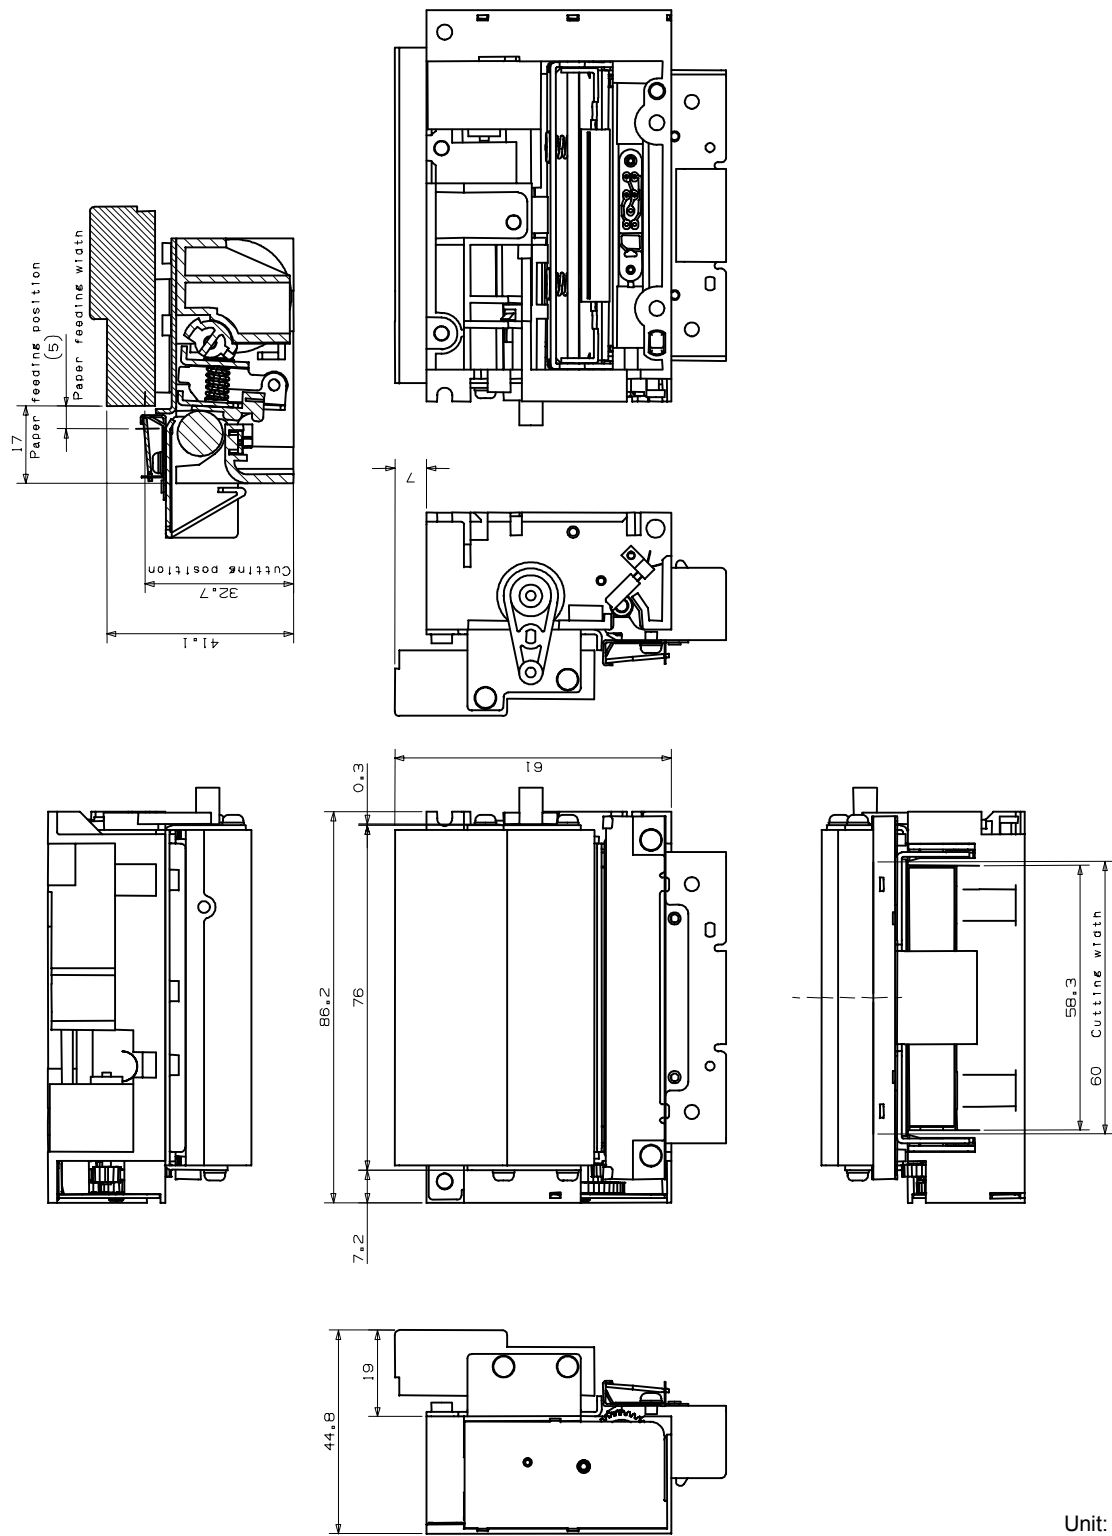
shows an appearance and external dimensions of the LTPF247 with the autocutter installed.
